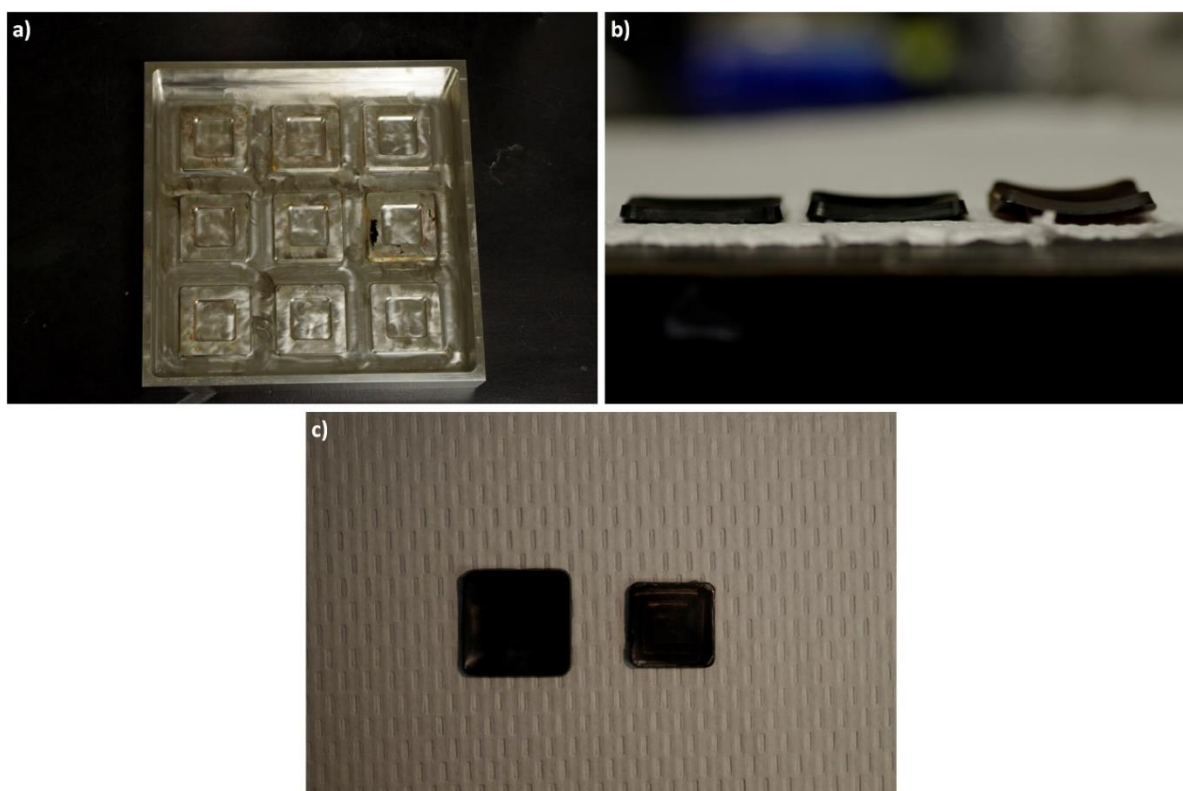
Initial xerogel moulding process a) Stainless steel mould b) Increased bowing with wearing of mould finish c) RF gel before pyrolysis (left) and xerogel (right)
